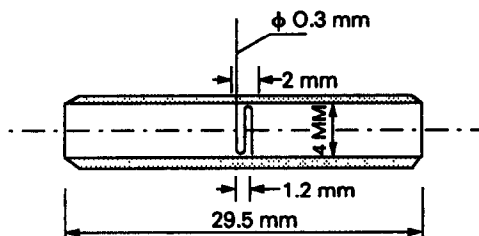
Tungsten wire shape and match of wire and graphite tube.
